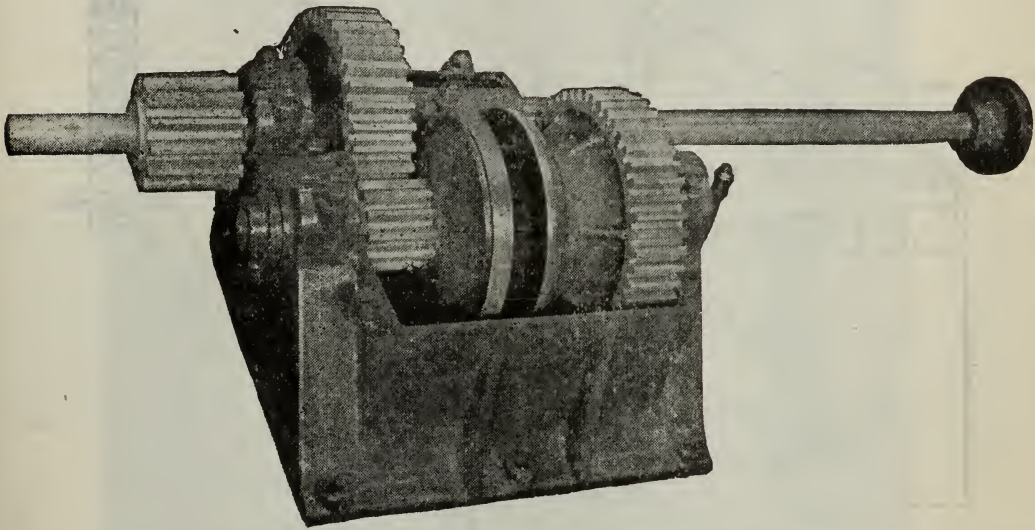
,228.—Niles crane construction: Mechanical load brake. It is of the double disc type with hard bronze wearing surfaces. It is automatic in action and self-contained, all thrusts being taken up within itself. The brake will not permit the load to run down unless the motor is revolved by power in the lowering direction. The brake, together with the intermediate steel gears, runs enclosed in a case, making a self-contained unit, insuring perfect accessibility, ideal lubrication and protection from dust and mechanical injury. The turned steel shafts revolve in self-oiling cap bearings, fitted with removable bronze bushings, the caps being attached by through bolts.
